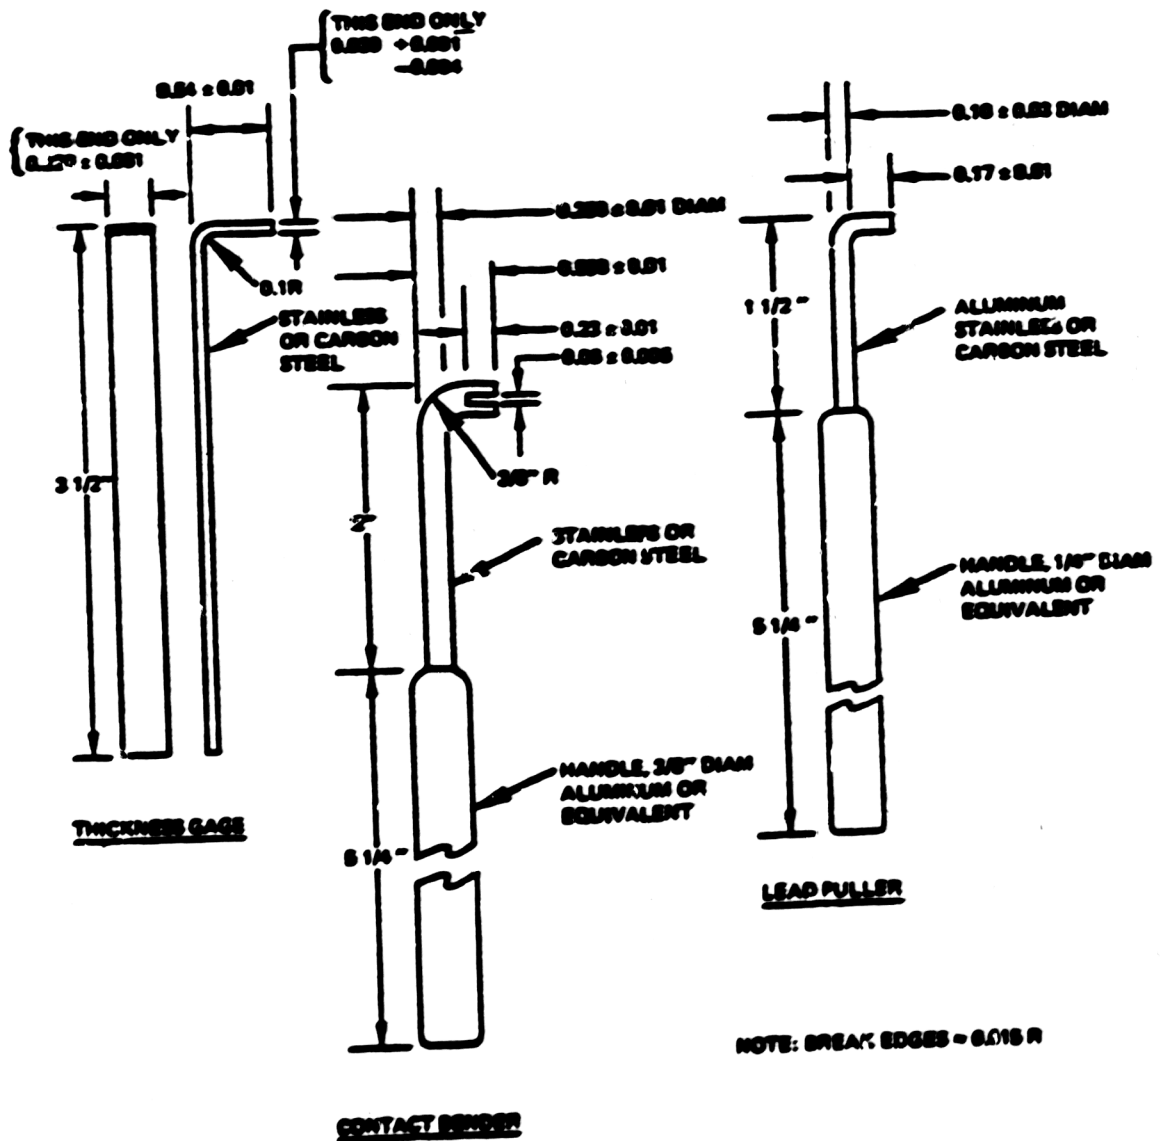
SPECIAL TOOLS AND GAGE FOR INSPECTING AND ADJUSTING MFA RELAY CONTACTS
